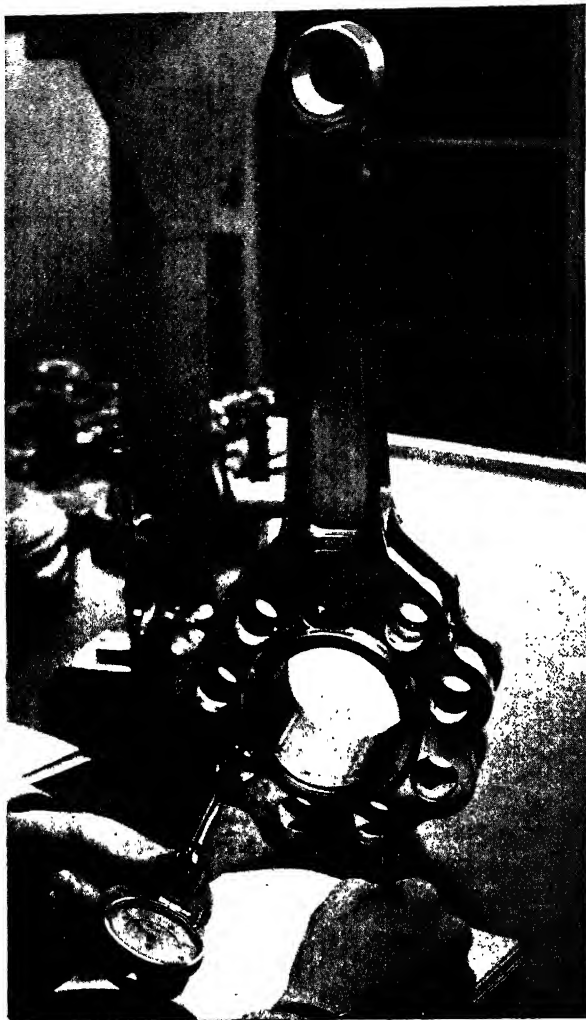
CHECKING KNUCKLE-PIN BORES IN MASTER ROD WITH
